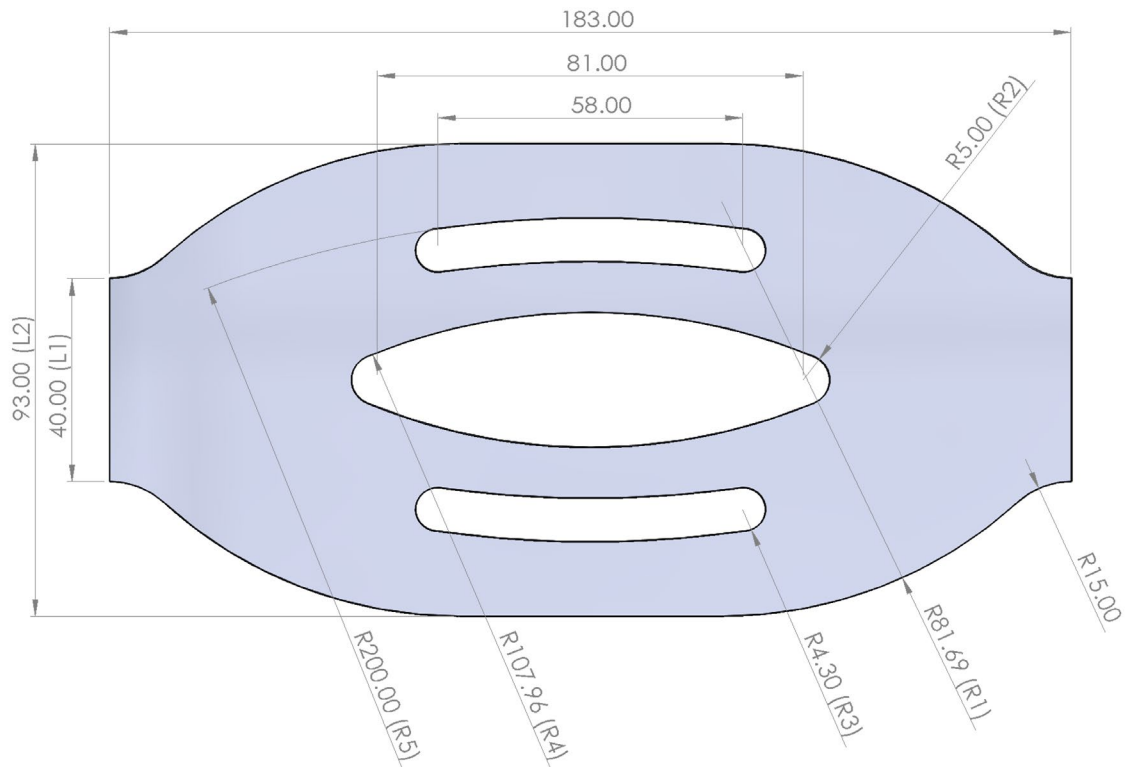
TopOpt specimen geometry and general dimensions in mm.
